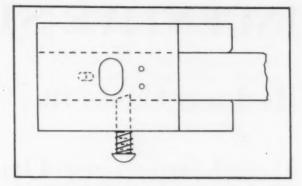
Station stops are properly shown in closed positions on tool drawings.
